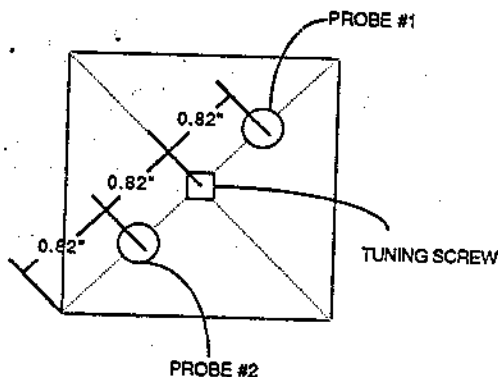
indicates how the probes and tuning screw are located on the top piece. My filters have used SMA bulkhead (4-hole flange) connectors for probes with the flange soldered to the inside of the top circuit board piece. The female threaded part extends through to the top via a large hole, but of course the flange is even larger so the inside of the box will be completely sealed. Up to 3456 MHz type N bulkhead connectors would also work but at higher frequencies they are too large to fit!
